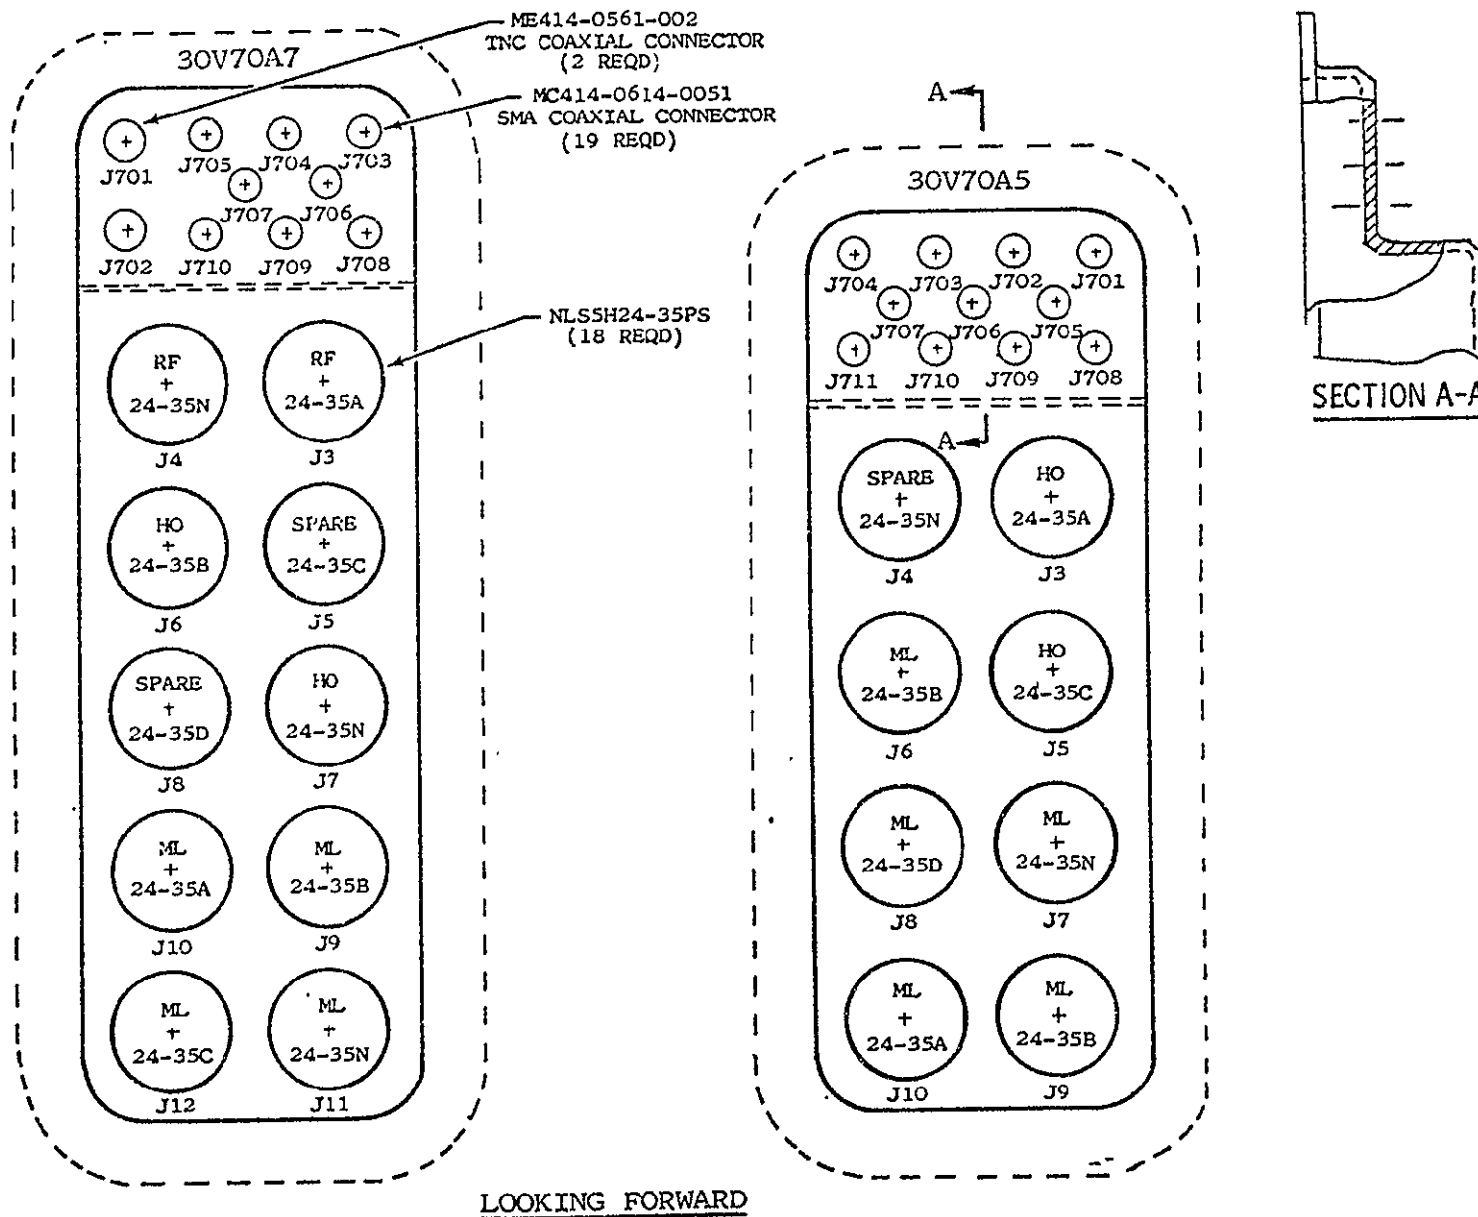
X₀ 576 PAYLOAD SERVICE PANEL ASSEMBLY
